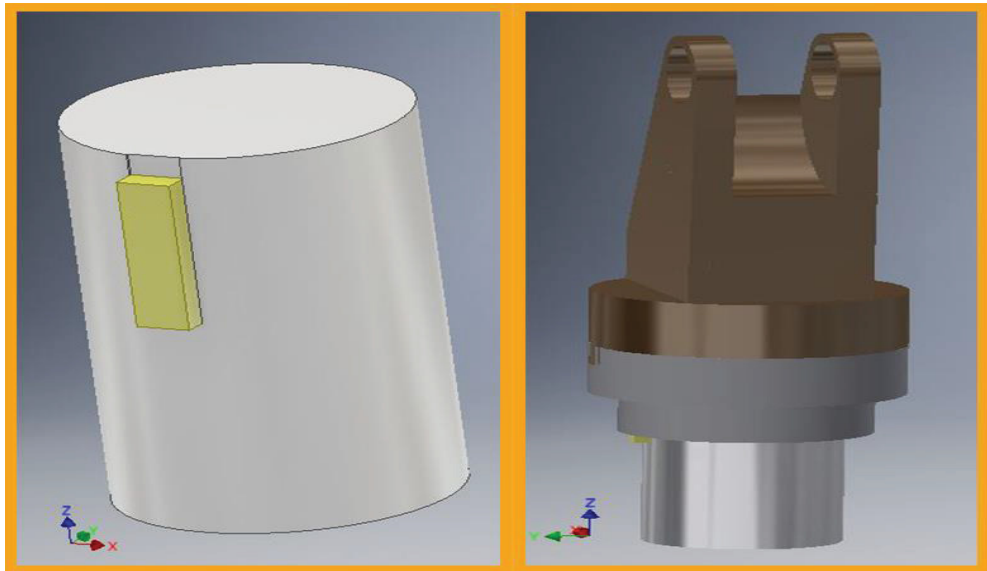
The shaft and Key of Oldham Coupling.
